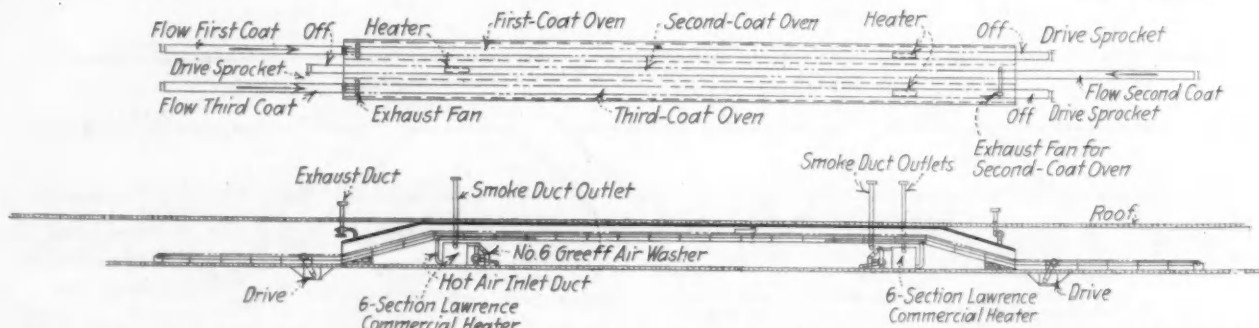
PLAN VIEW AND SIDE ELEVATION OF A TUNNEL-TYPE BODY-OVEN BUILT AGAINST THE CEILING WITH THE ENDS INCLINED TO THE FLOOR
